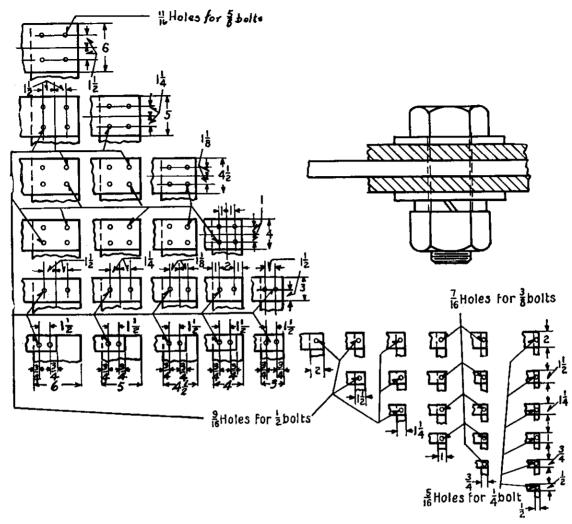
Recommended Spacings and Bolt Diameters for Copper Bar Joints. A Palnut or Other Locking Device may be Used in Place of Lock Washer Shown.
